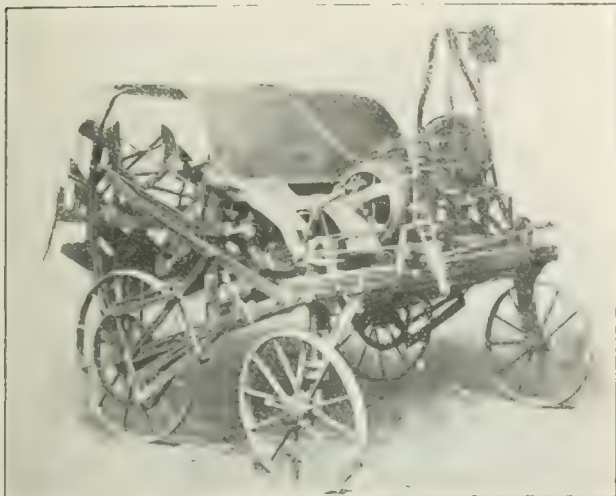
The Auto Sand Mixer Built by the Sand Mixing Machine Company, New York.
